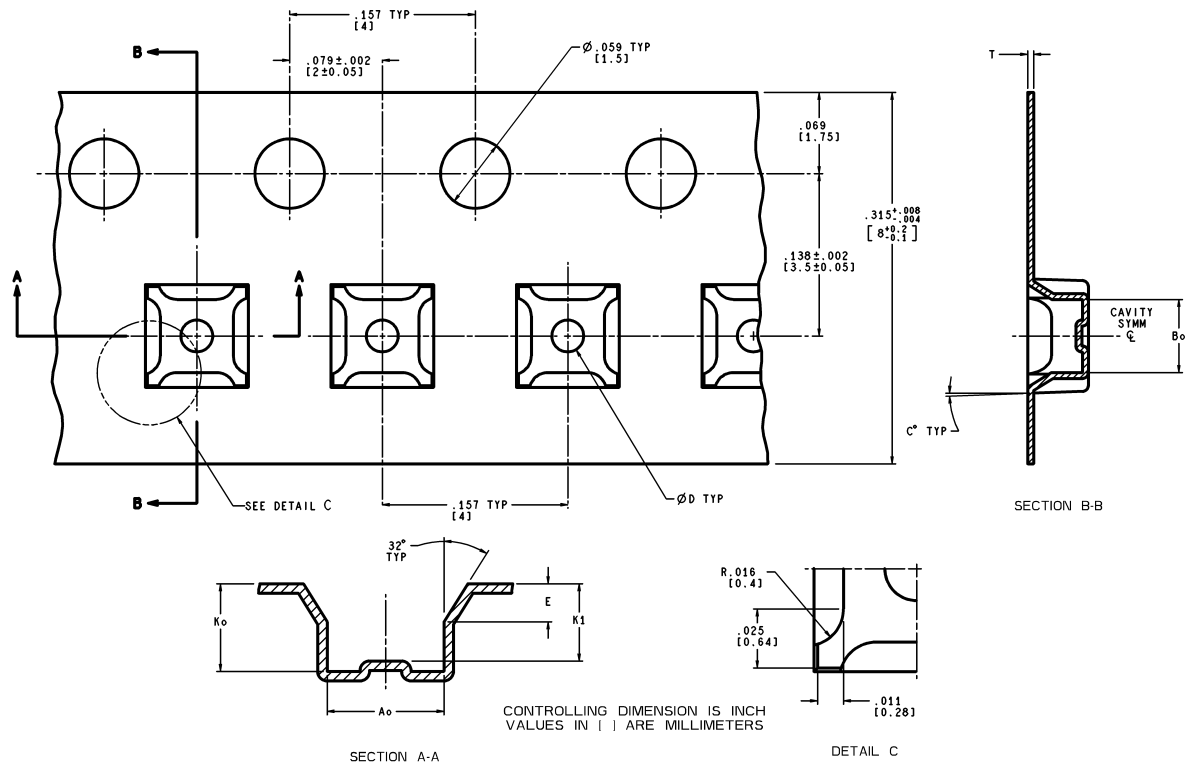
Micro SMD 8 bump Tape & Reel Design
